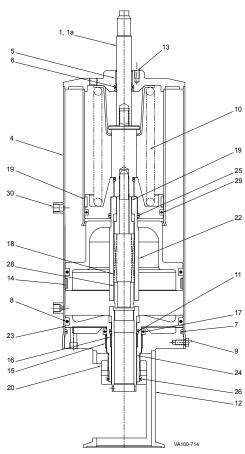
W71 Sch. 5 Actuator Assembly (Seat Lift Valve)
